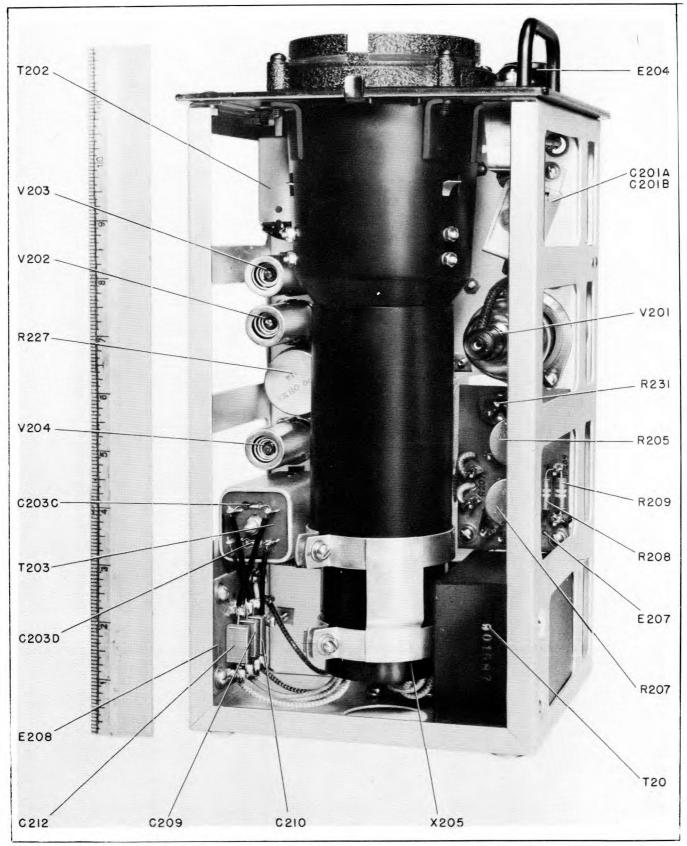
Indicator I-152-A or I-152-AM — Chassis Top View (Left Oblique)
